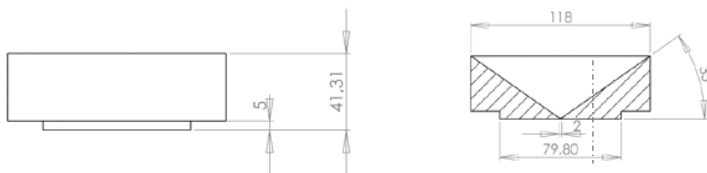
Dimensional specifications of the solar receiver. Dimensions are in millimeters.
